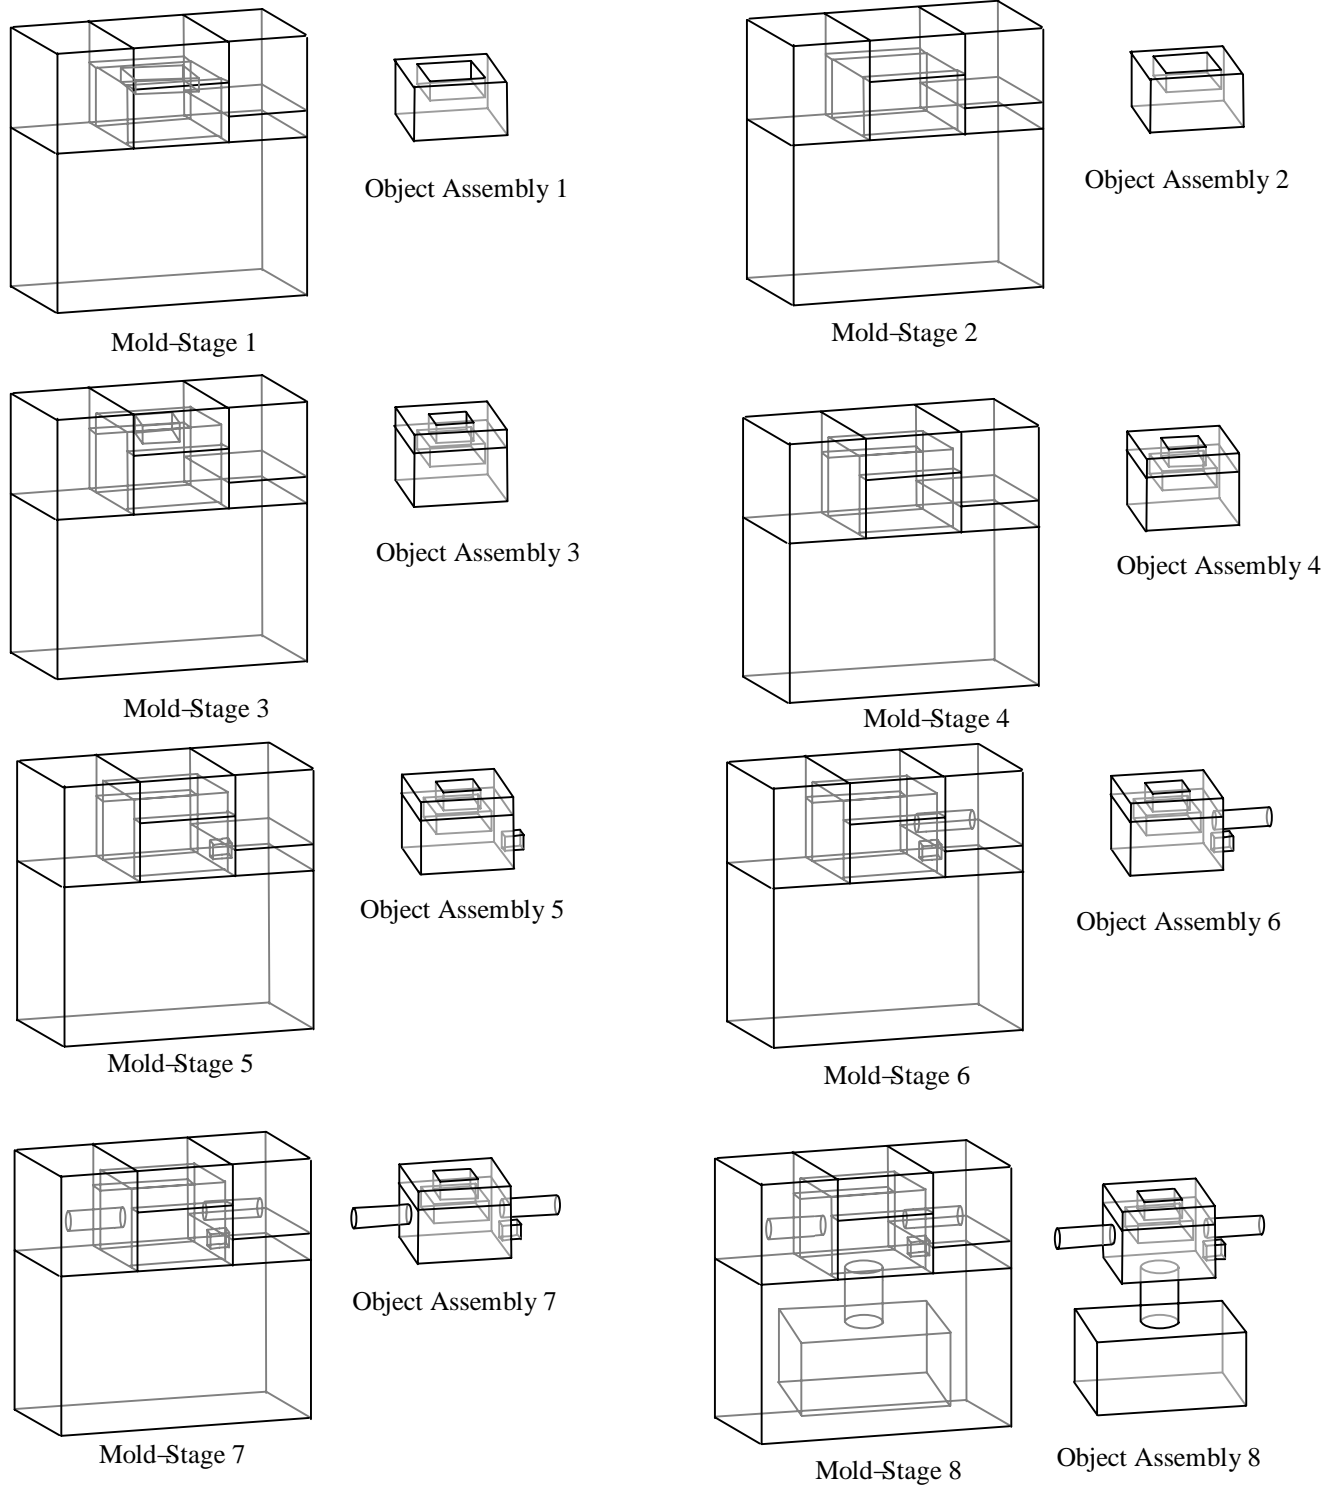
Mold stages for the example part in Figure 2 and the state of object assembly after each stage
